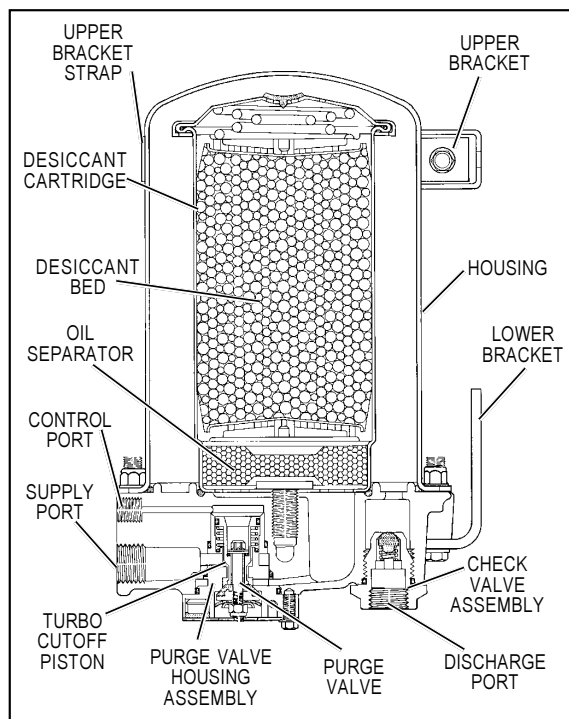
AD-9 AIR DRYER SECTIONAL VIEW
